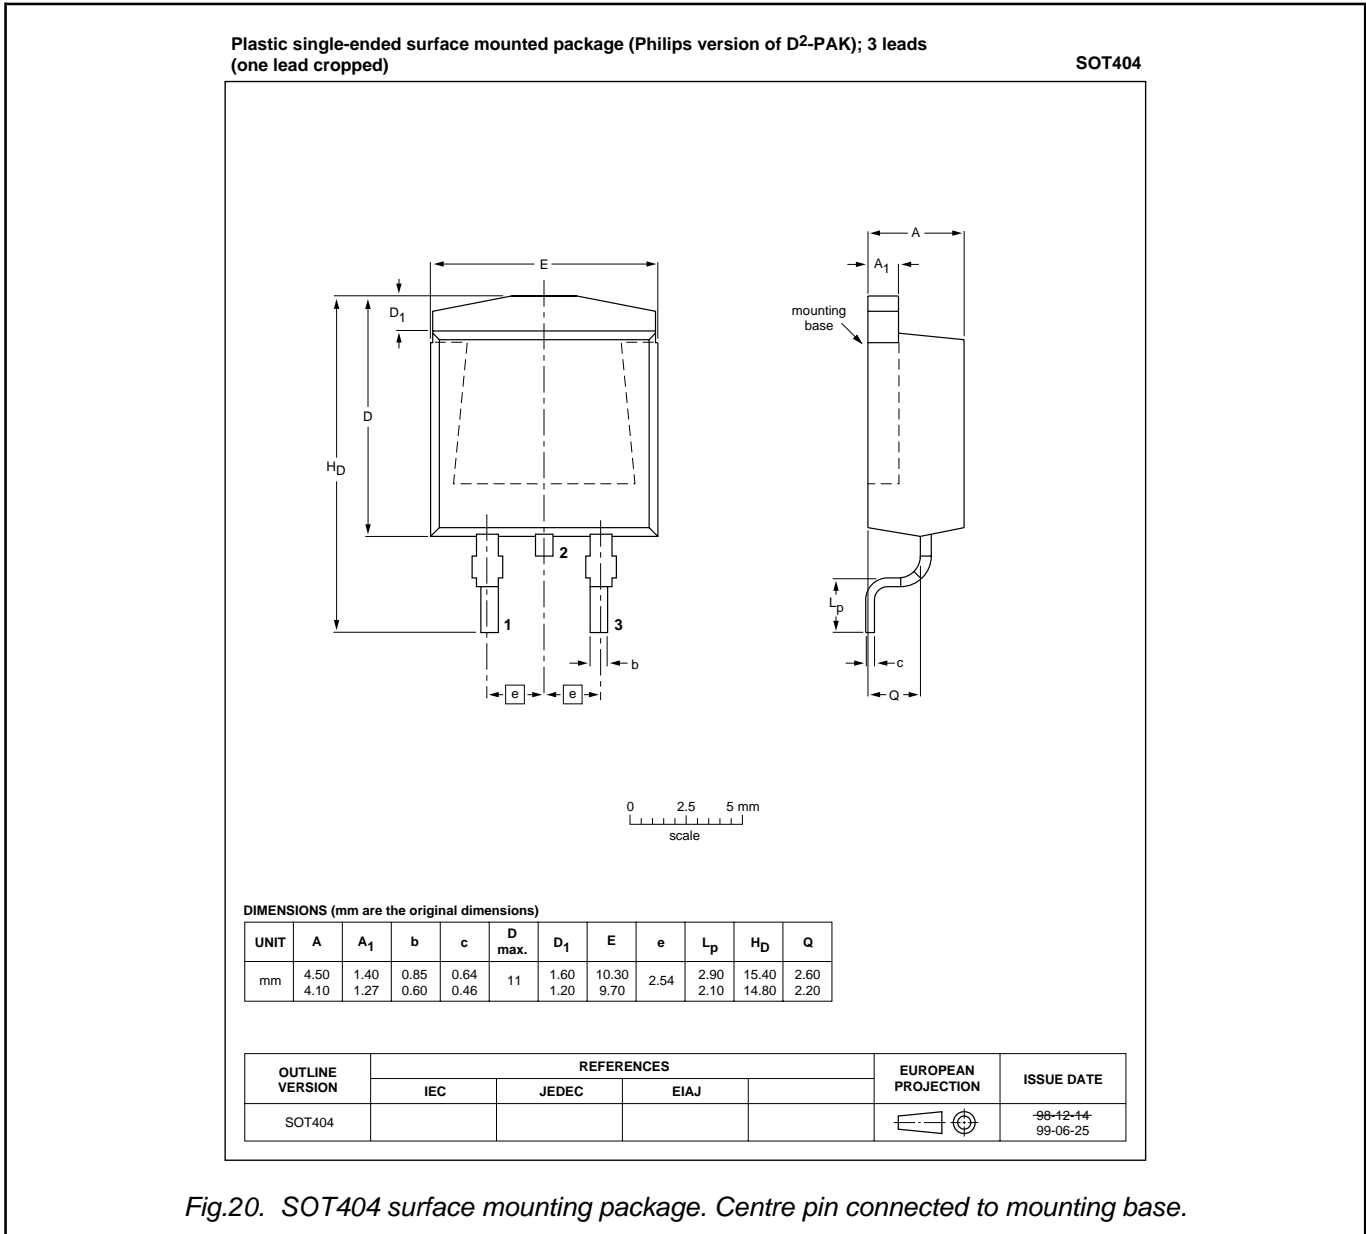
SOT404 surface mounting package. Centre pin connected to mounting base.
